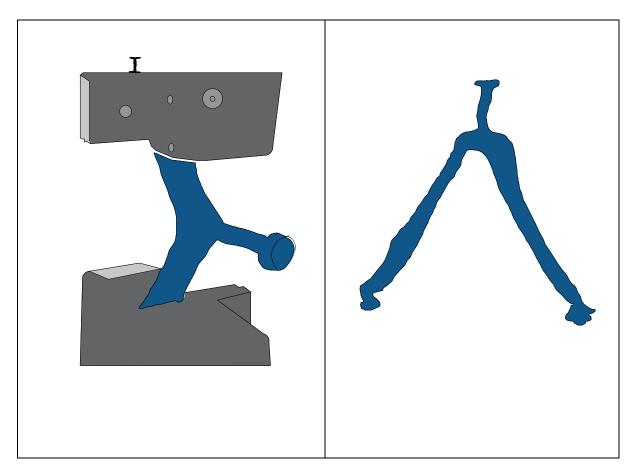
Illustration Diagram For Clamping of Strap to Toe Post Sample to be Fixed in Tensile Testing Machine
